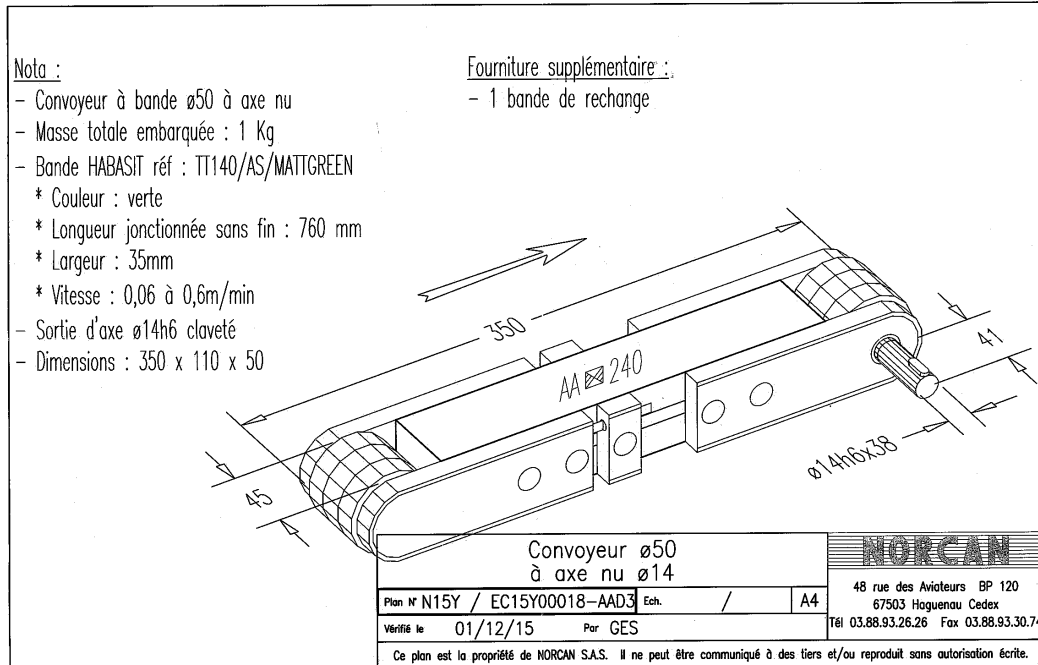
Plan of the conveyor belt. Dimensions are in millimeters.
